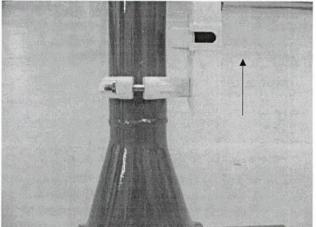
Basket Adjustment Step 2 – Forward Fitting Aligned (Aft beam moved up to align forward fitting with keyway)
